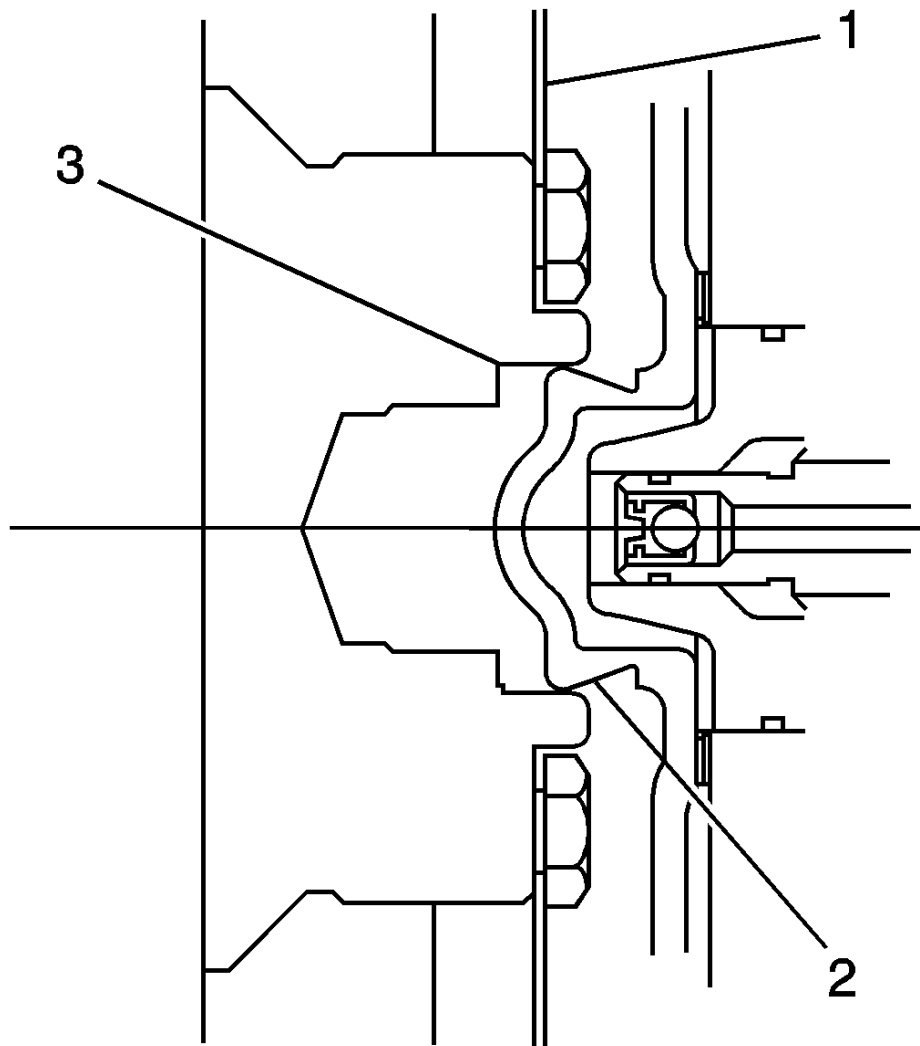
View Of Torque Converter Hub In Engine Crankshaft
